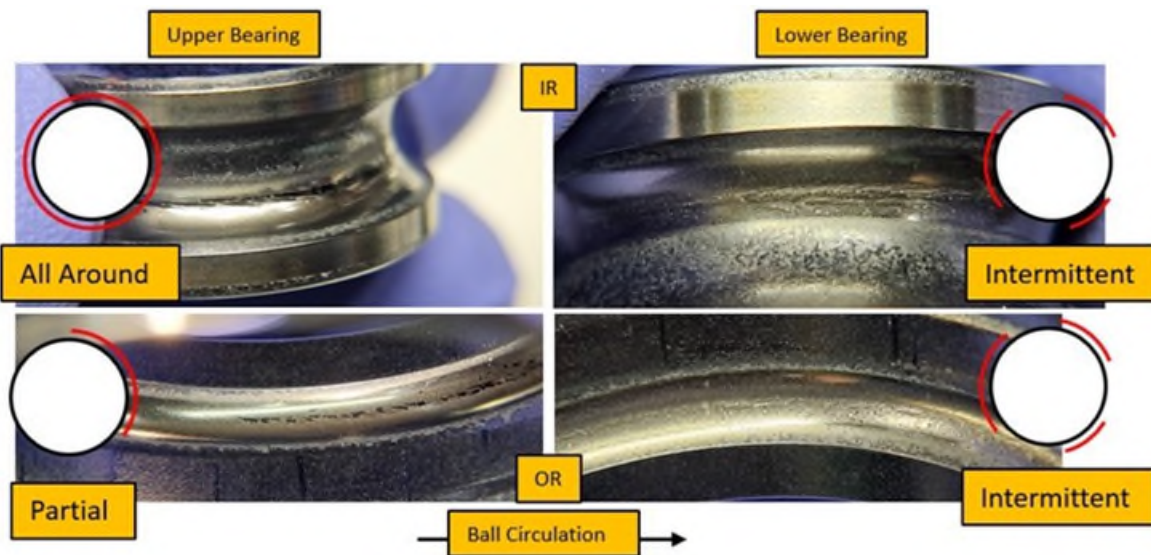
Upper duplex bearing (left) and lower bearing (right) visual inspection after no-load testing to failure.
